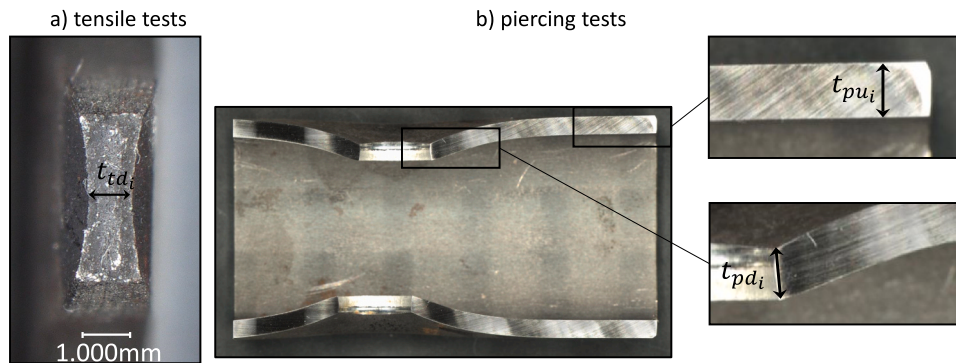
Thickness analysis – a) example of fracture in tensile test b) piercing test (tube cross-section and details of the thickness measurements)
